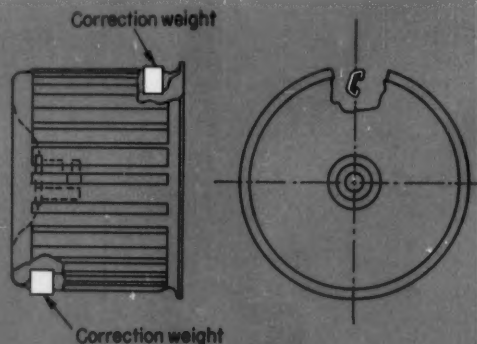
Two-plane correction of unbalance in blower rotor using spring clips as balancing weights for incremental adjustments.
